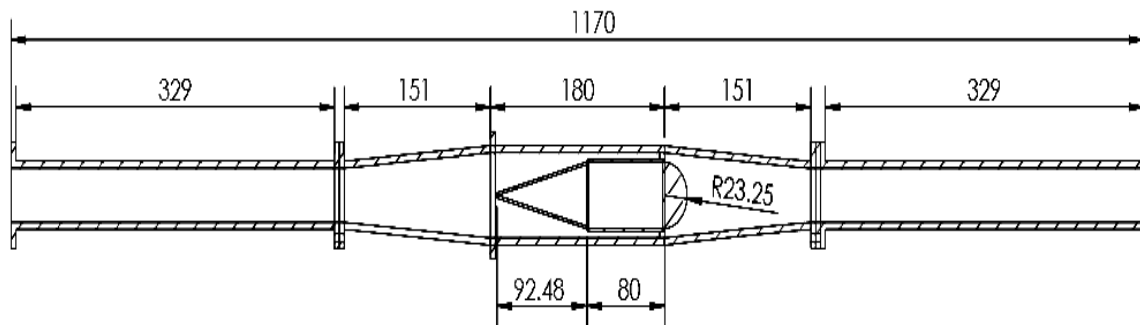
Schematic layout of exhaust heat exchanger (test section 60 × 60 × 180 mm) with cone-cylinder insert (H-type).
